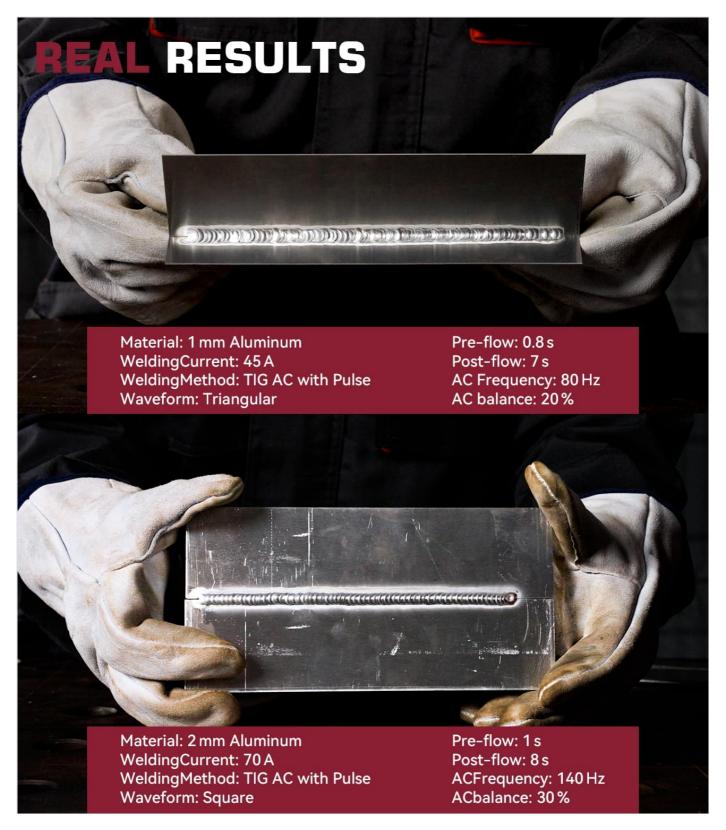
Examples of real welding results on aluminum. The top image shows a weld on 1mm aluminum using TIG AC with Pulse (Triangular waveform), and the bottom image shows a weld on 2mm aluminum using TIG AC with Pulse (Square waveform), demonstrating the quality achievable with different settings.
